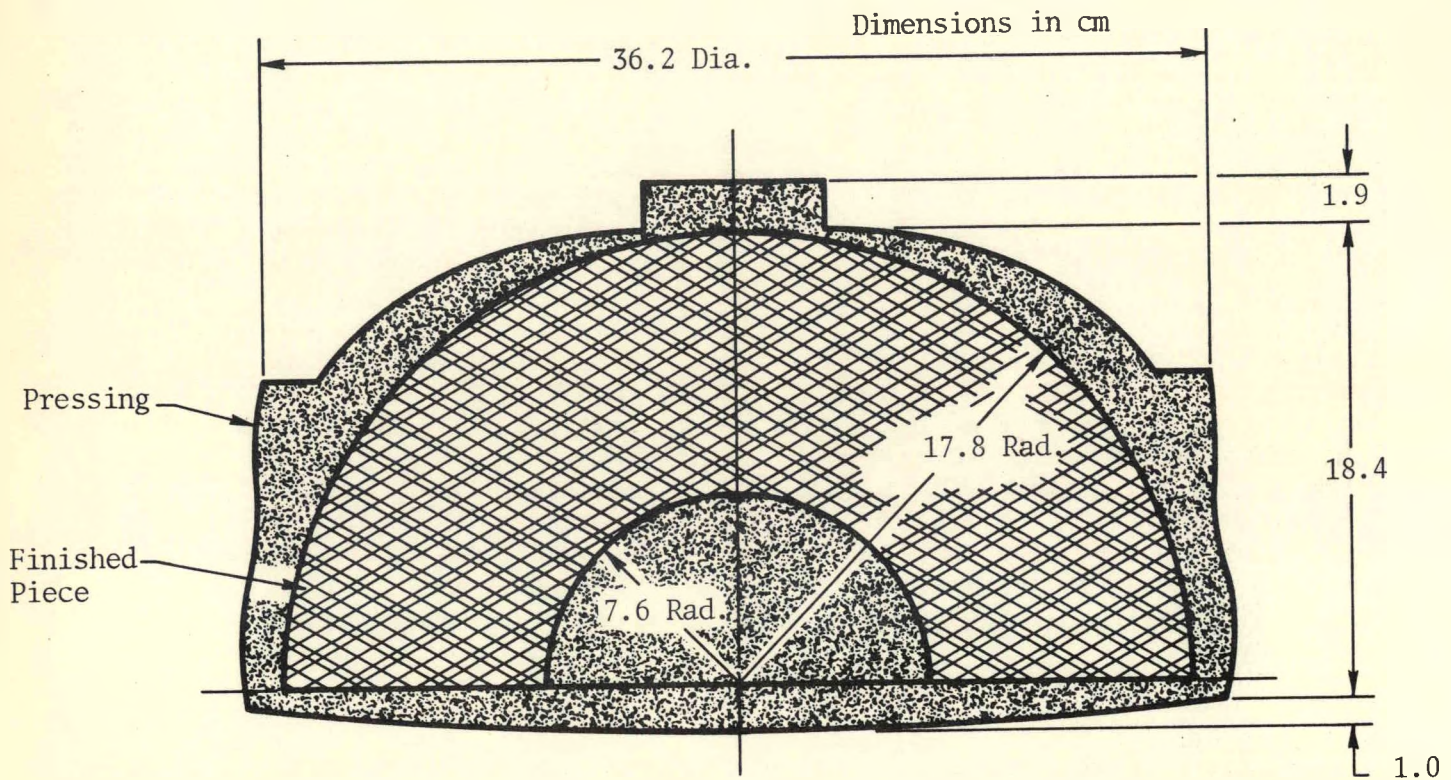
LX-09 As-Pressed Billet with Finished Piece Dimensions
